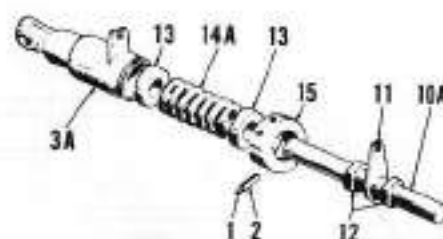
Exploded view of front end assembly of double acting (draft sensitive under both tension and compression) top link.
